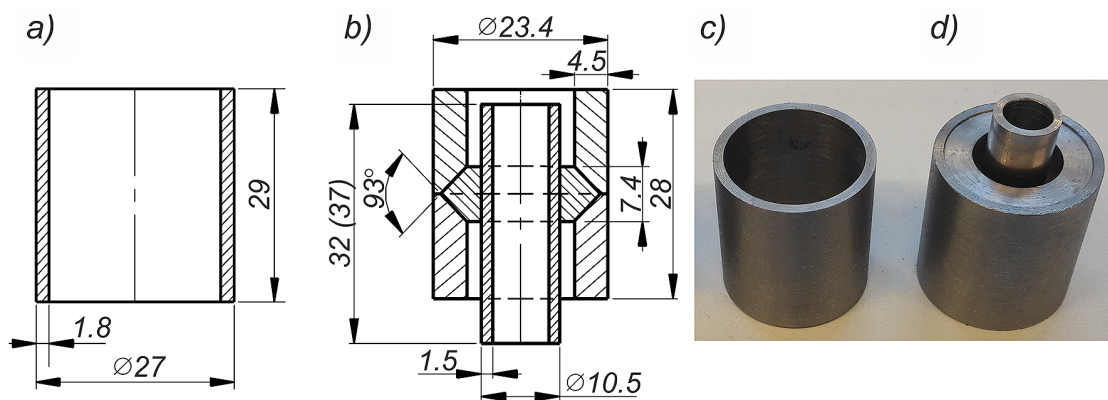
Shape and dimensions of the billet (a, c), the deformable insert assembly (b), and the view in the output configuration of the insert assembly placed inside the steel billet (d)
